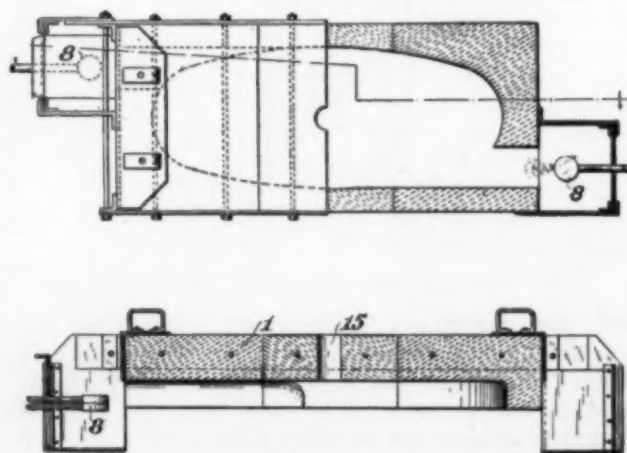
PLAN AND ELEVATION OF DWIGHT-LLOYD ROASTER
